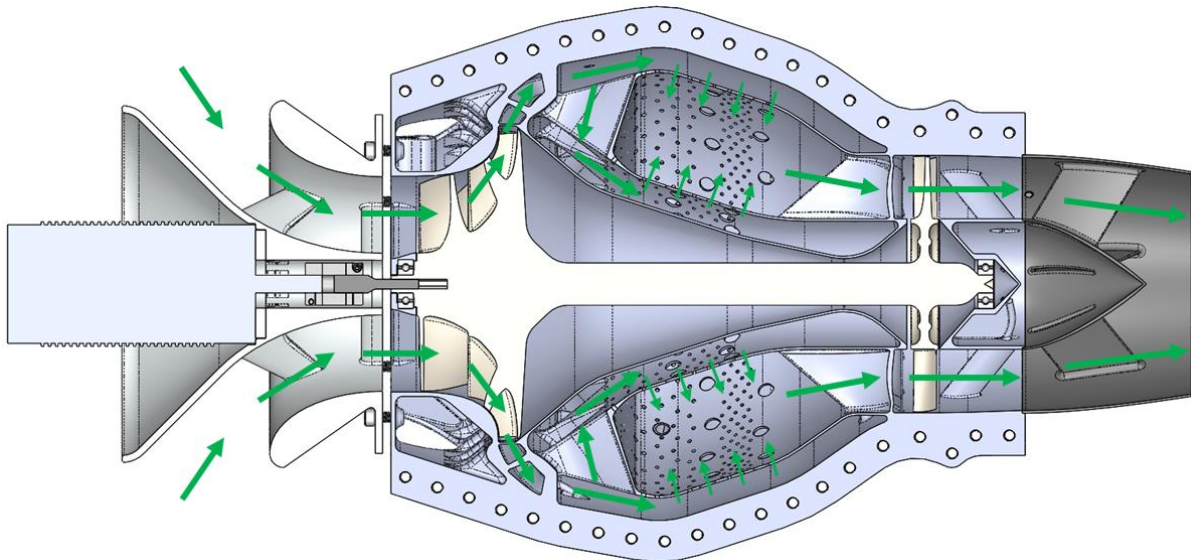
Flow Path of Air & Exhaust Gas through Engine
